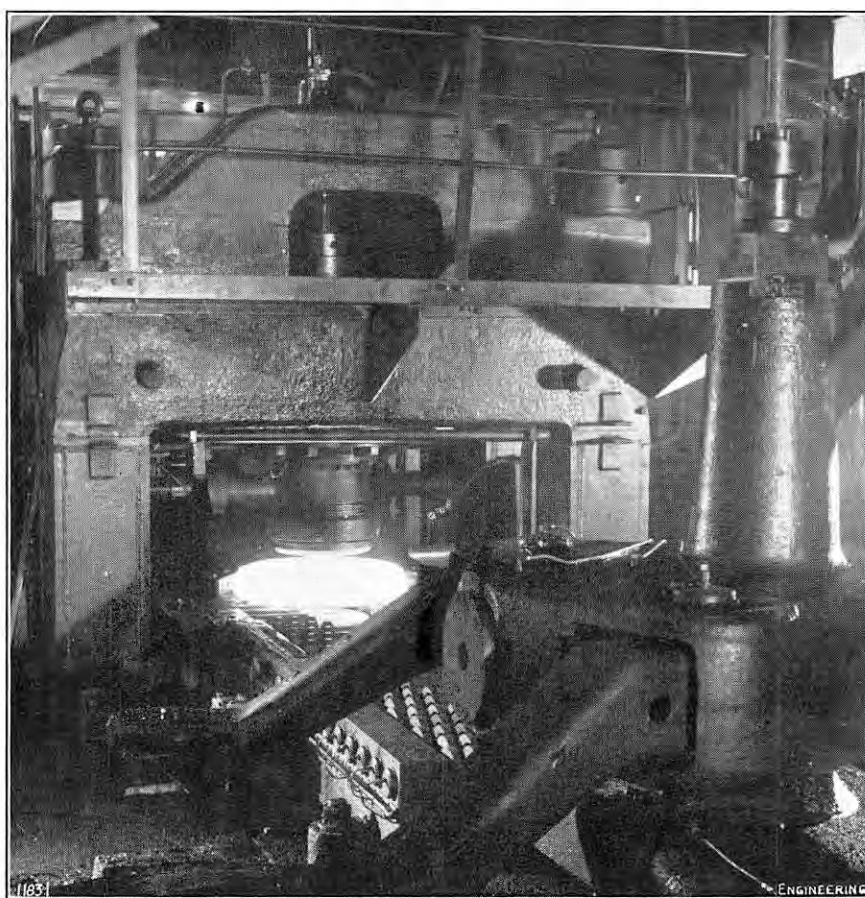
FORGING IN 1,000-TON PUNCH PRESS.
